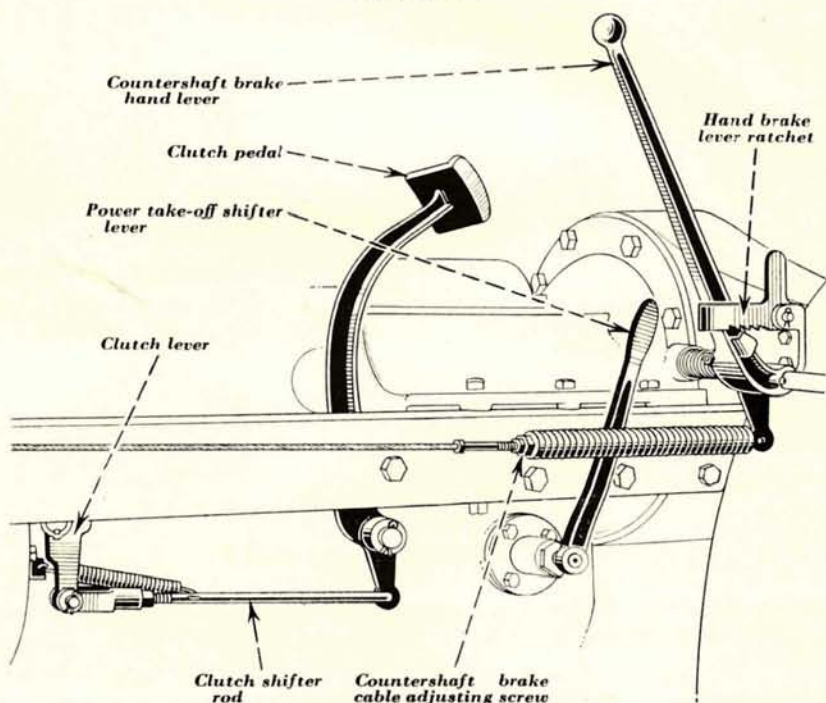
Illustration No. 23—Left side, showing clutch pedal, brake lever, etc.
